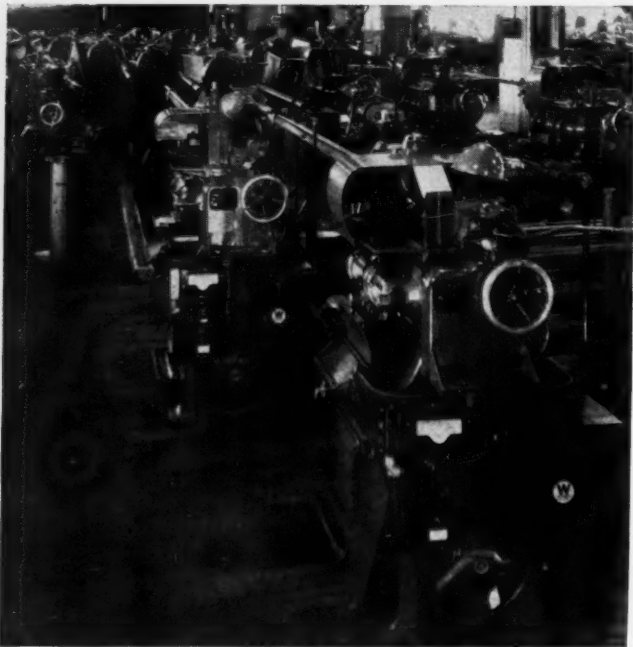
Battery of screw machines showing motors mounted in the bases of the machines. Motors are protected but are readily accessible in case of any trouble.
